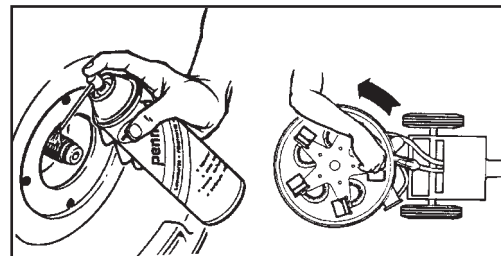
Lubricate Shaft and Re-install Head Assembly
